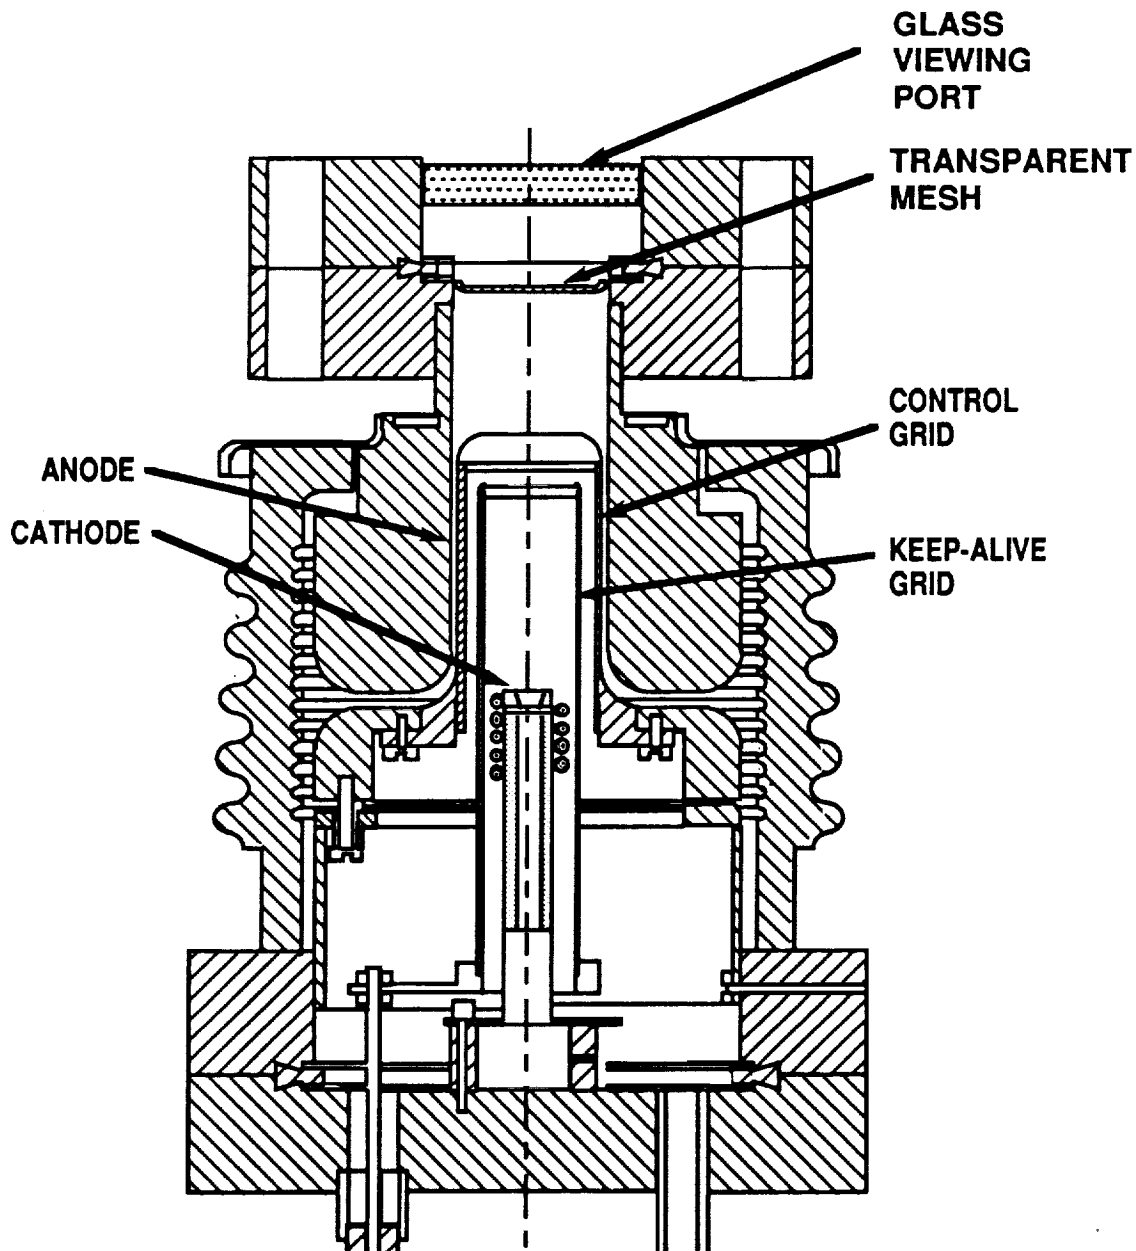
Cross-section of laboratory prototype HOLLOWTRON with viewing window installed.
